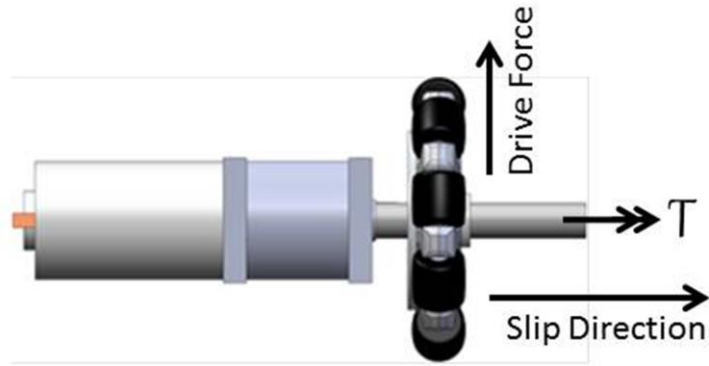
Side view of a DC motor and omni-wheel showing traction and slip directions
